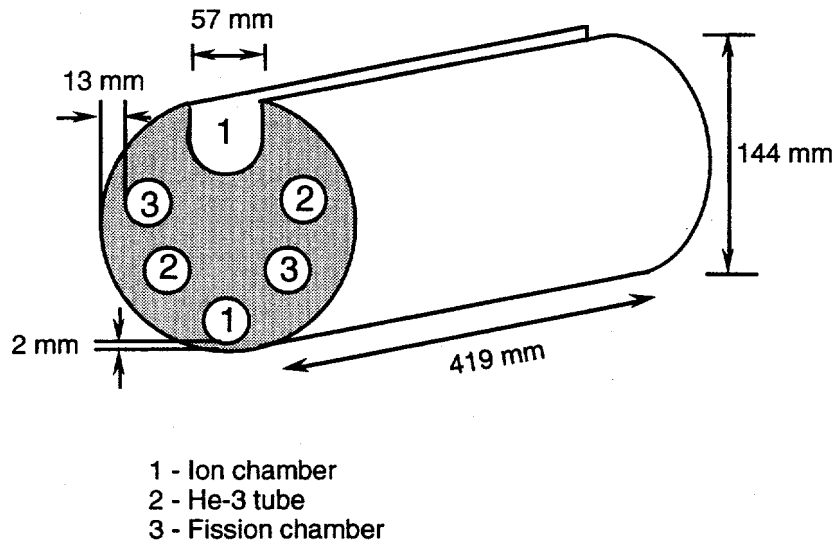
Detailed drawing of the polyethylene insert that holds the fission chambers, ³He tubes, and ion chambers in the large FUGM detector package.
